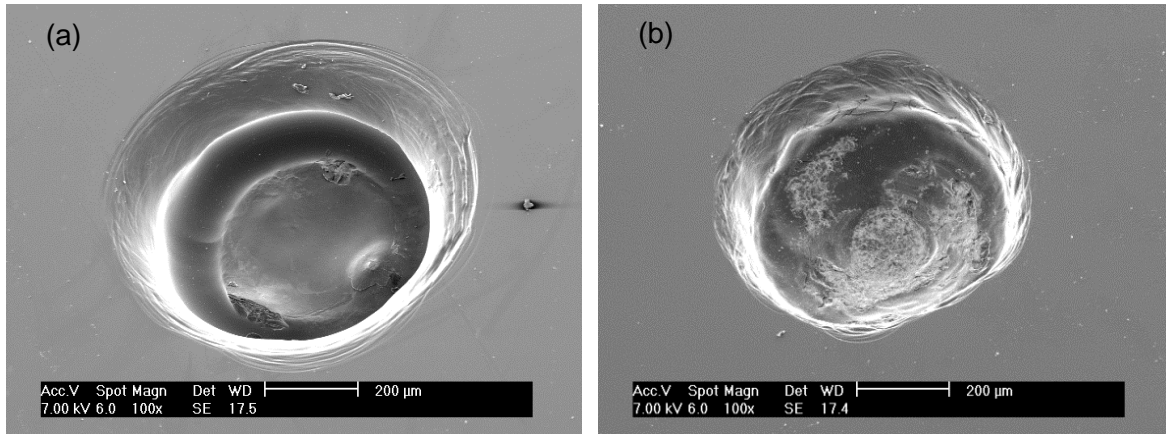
Micro holes drilled by (a) conventional ECDM drilling and (b) EDAC drilling.
